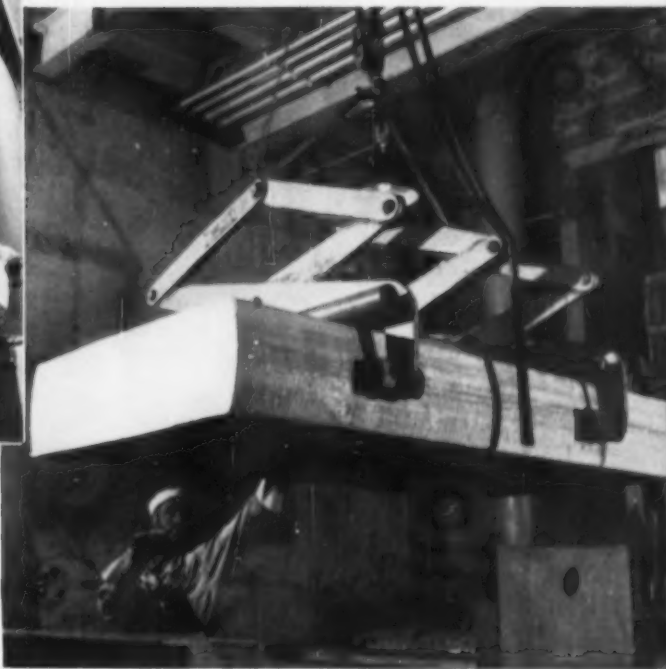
Slab Ingot Being Hoisted Out of Casting Pit, Enroute to Milling Machine Where Entire Surface Will Be Scalped
